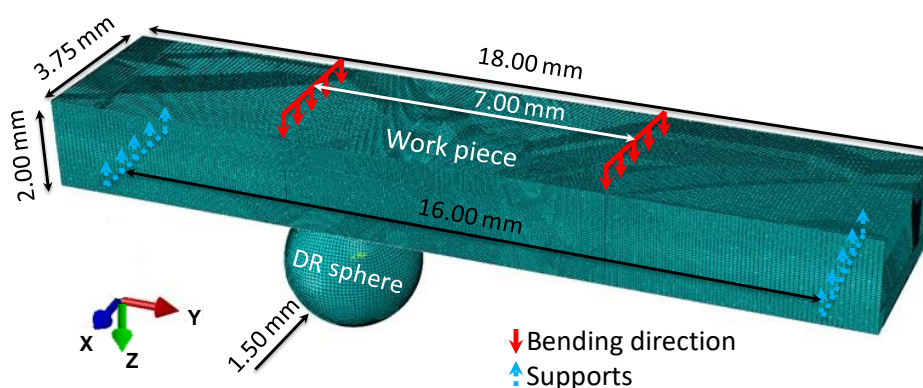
Pre-stressed DR – work piece and tool geometries
